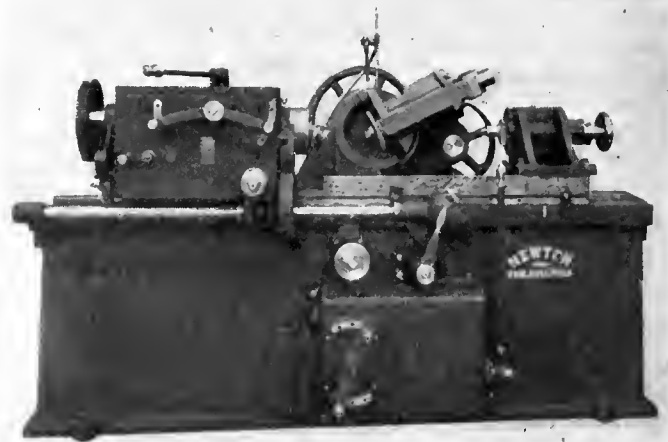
OPERATING SIDE OF WORM MILLING MACHINE SHOWING CUTTER AND FEED-CHANGE BOX
